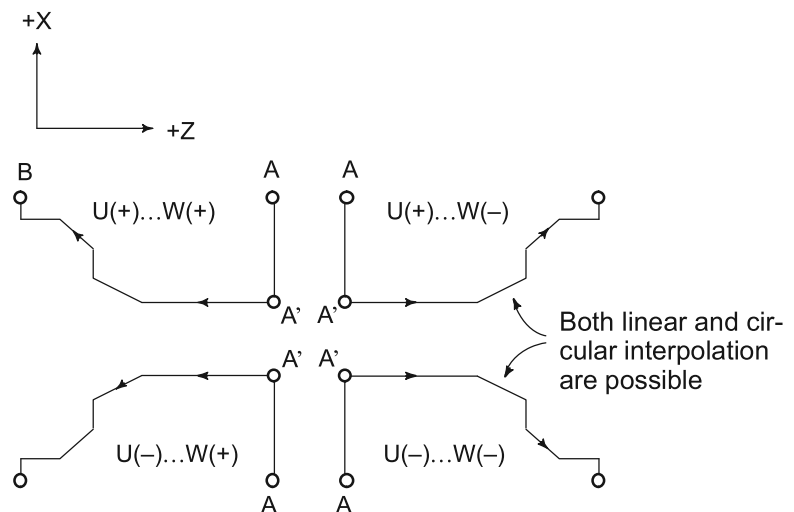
(a) Cutting path in stock removal in turning (Type I)
